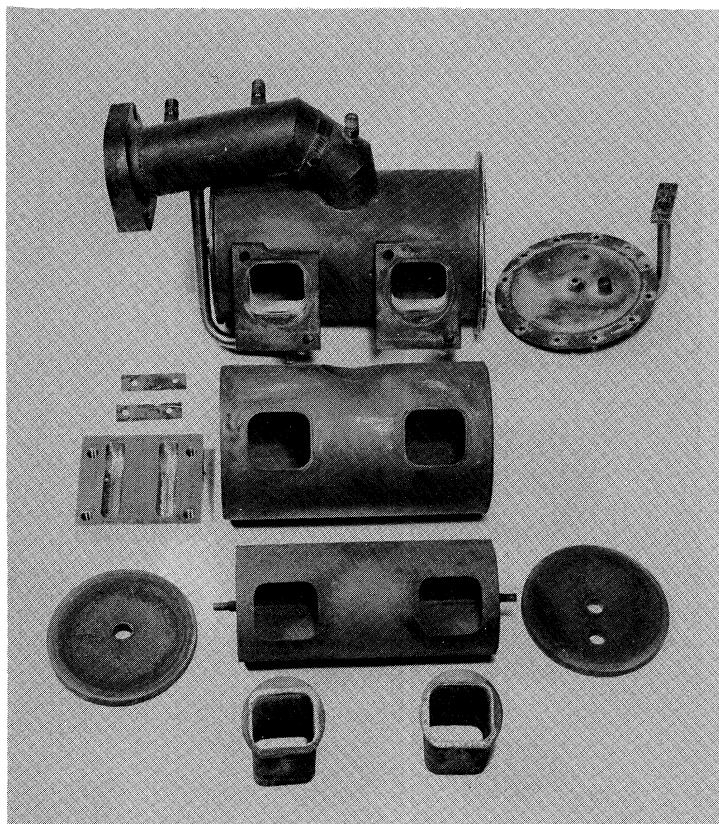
WAD reactor disassembly—after 97-1/2 hours of testing.
